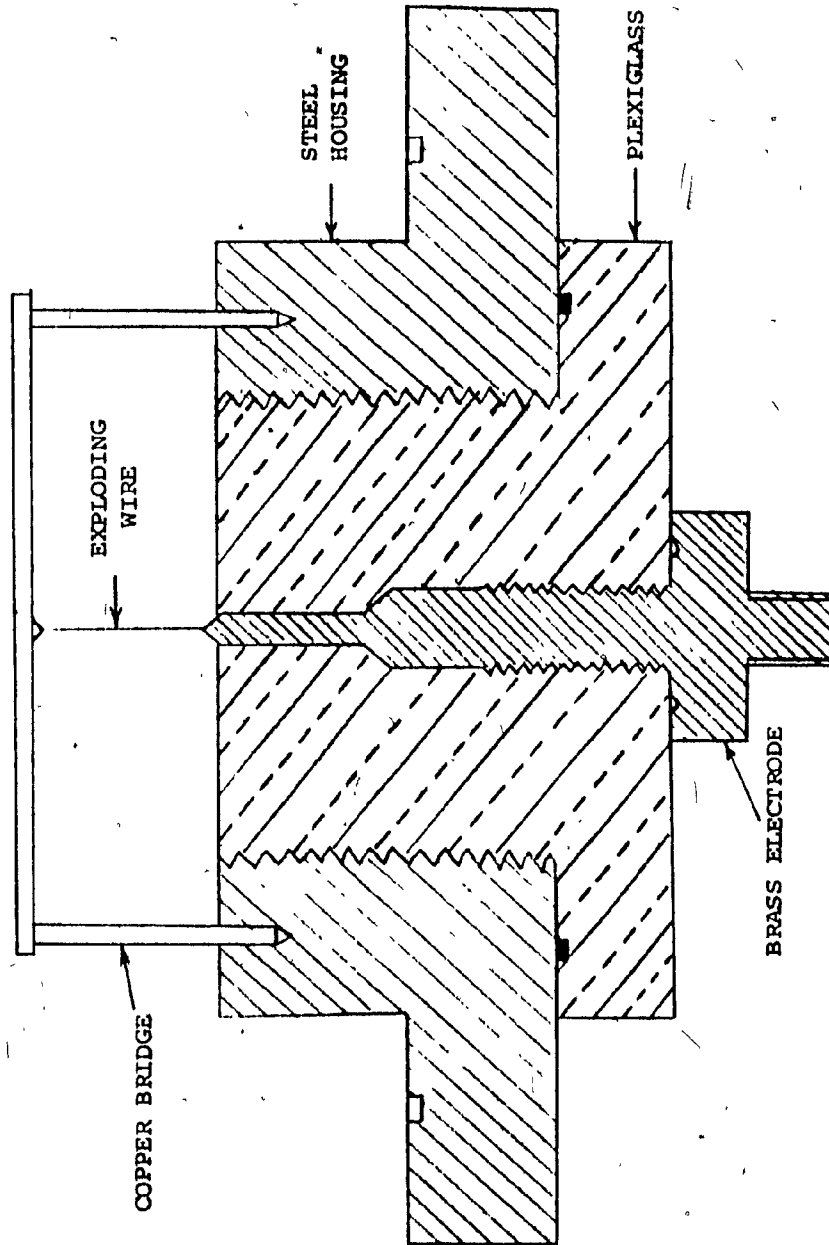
SKETCH OF THE EXPLODING-WIRE ATTACHMENT
